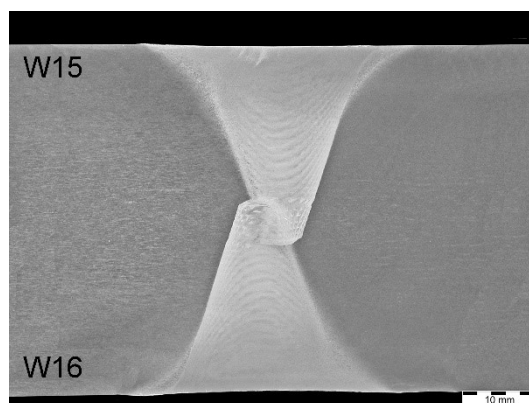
Macrograph of weld-flip-weld process in 50 mm thick AA5083 showing the skewed nature of the stir zone (Cater (2020)).
